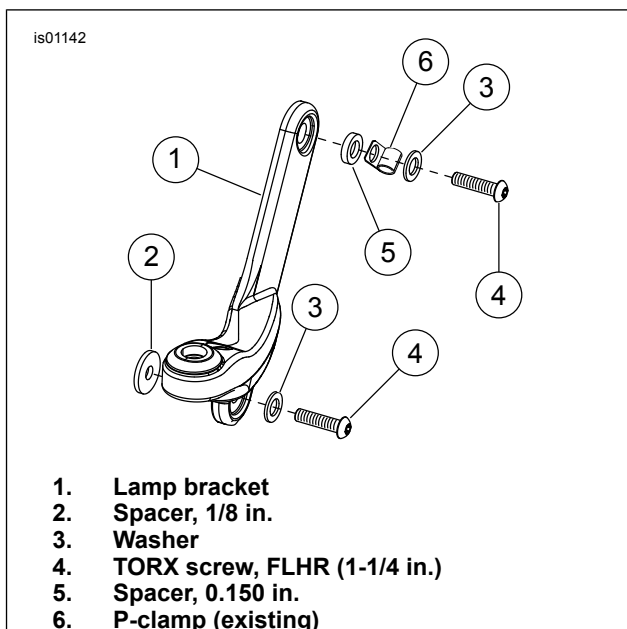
Lamp Bracket Assembly (FLHRS) Without Windshield
